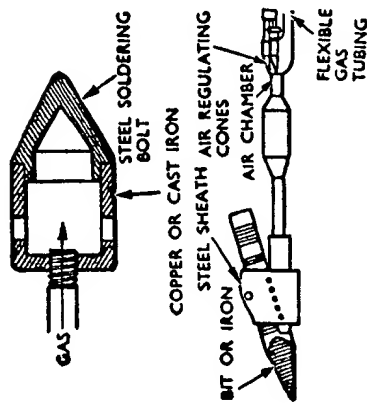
Top, gas-heated soldering bit. Bottom, the complete assembly of above showing the various parts.
